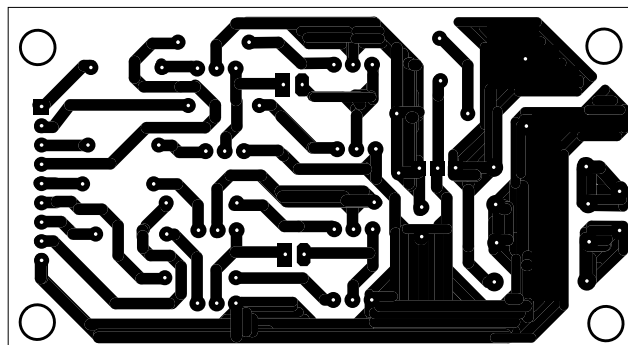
Actual-size, single-side PCB layout for PC-based stepper motor controller
